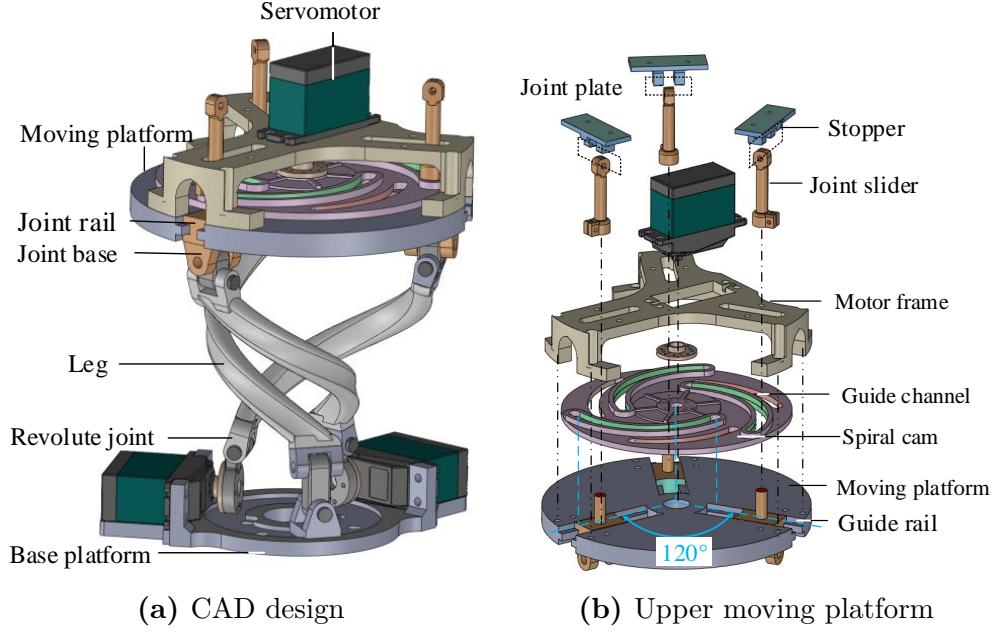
Schematics of the proposed device. (a) CAD design. (b) Assembly view of the upper moving platform of the device, which includes the spiral cam mechanism that actuates the three joint sliders driving the end-effectors.
